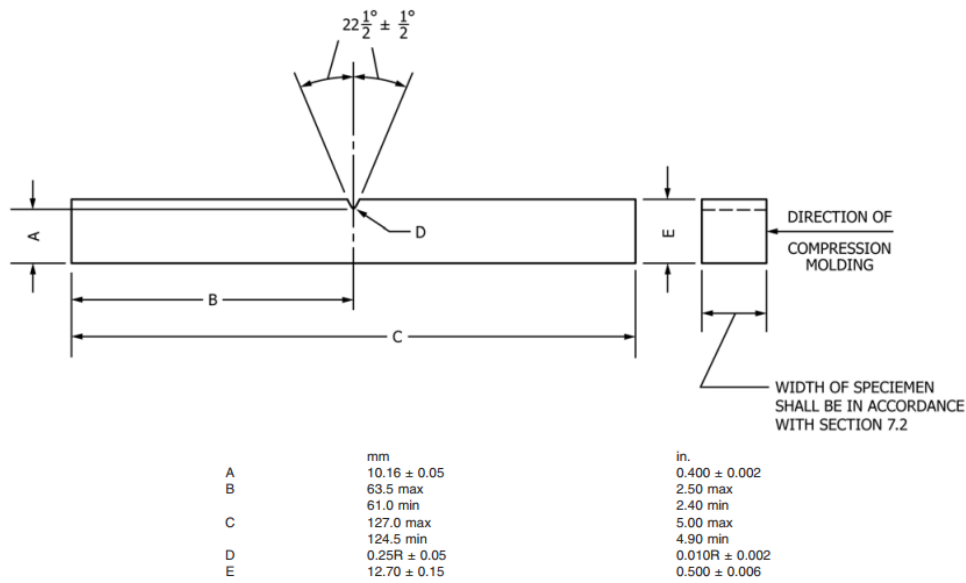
Dimensions of Charpy impact test specimen (ASTM D6110)
